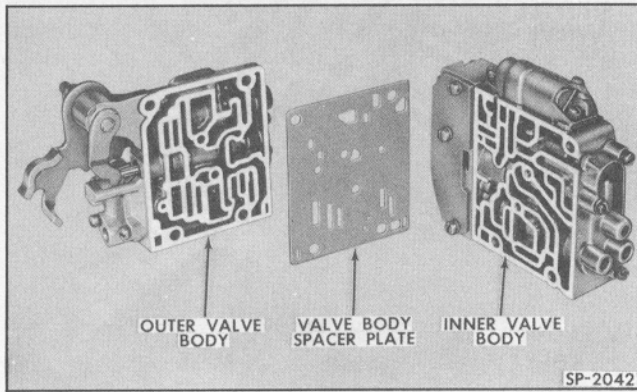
Inner and Outer Valve Body and Spacer Plate
